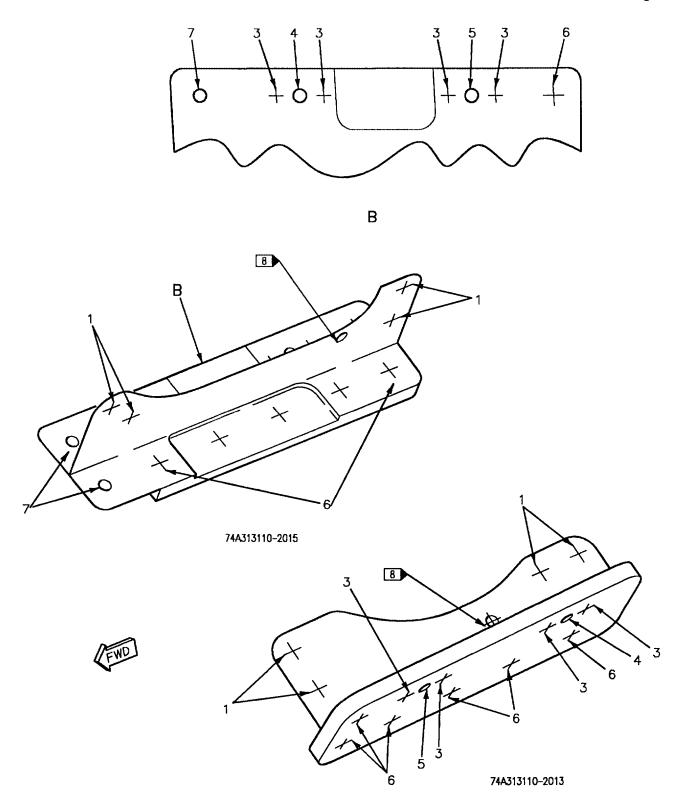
Pitot Probe Support, 74A313110, Fastener Index (Sheet 1)
